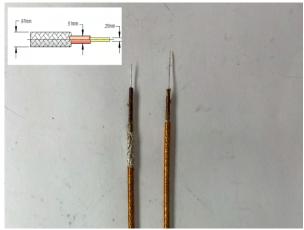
An example of the stripped cable ends with a schematic of the cable layering.
